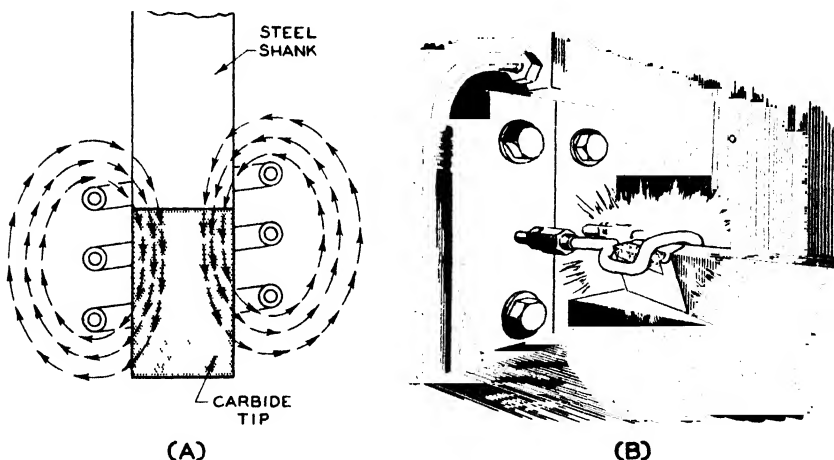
Basic Principle of Induction Heating (A). The Carbide Heats Through, while the Shank Is Heated Only on the Surface To Be Brazed (B)
